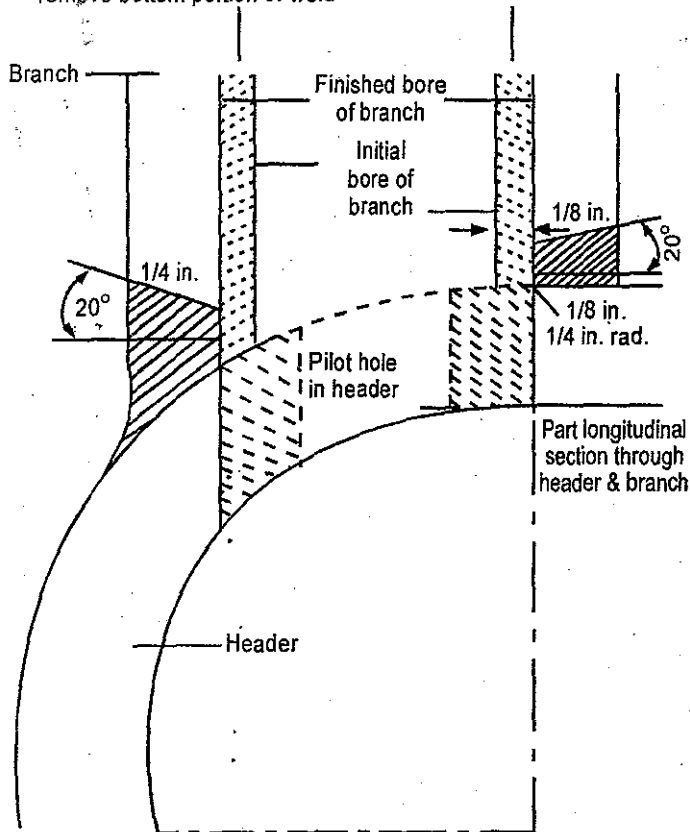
A — BRANCH WELDED ON HEADER WITH INTERNAL MACHINERY
